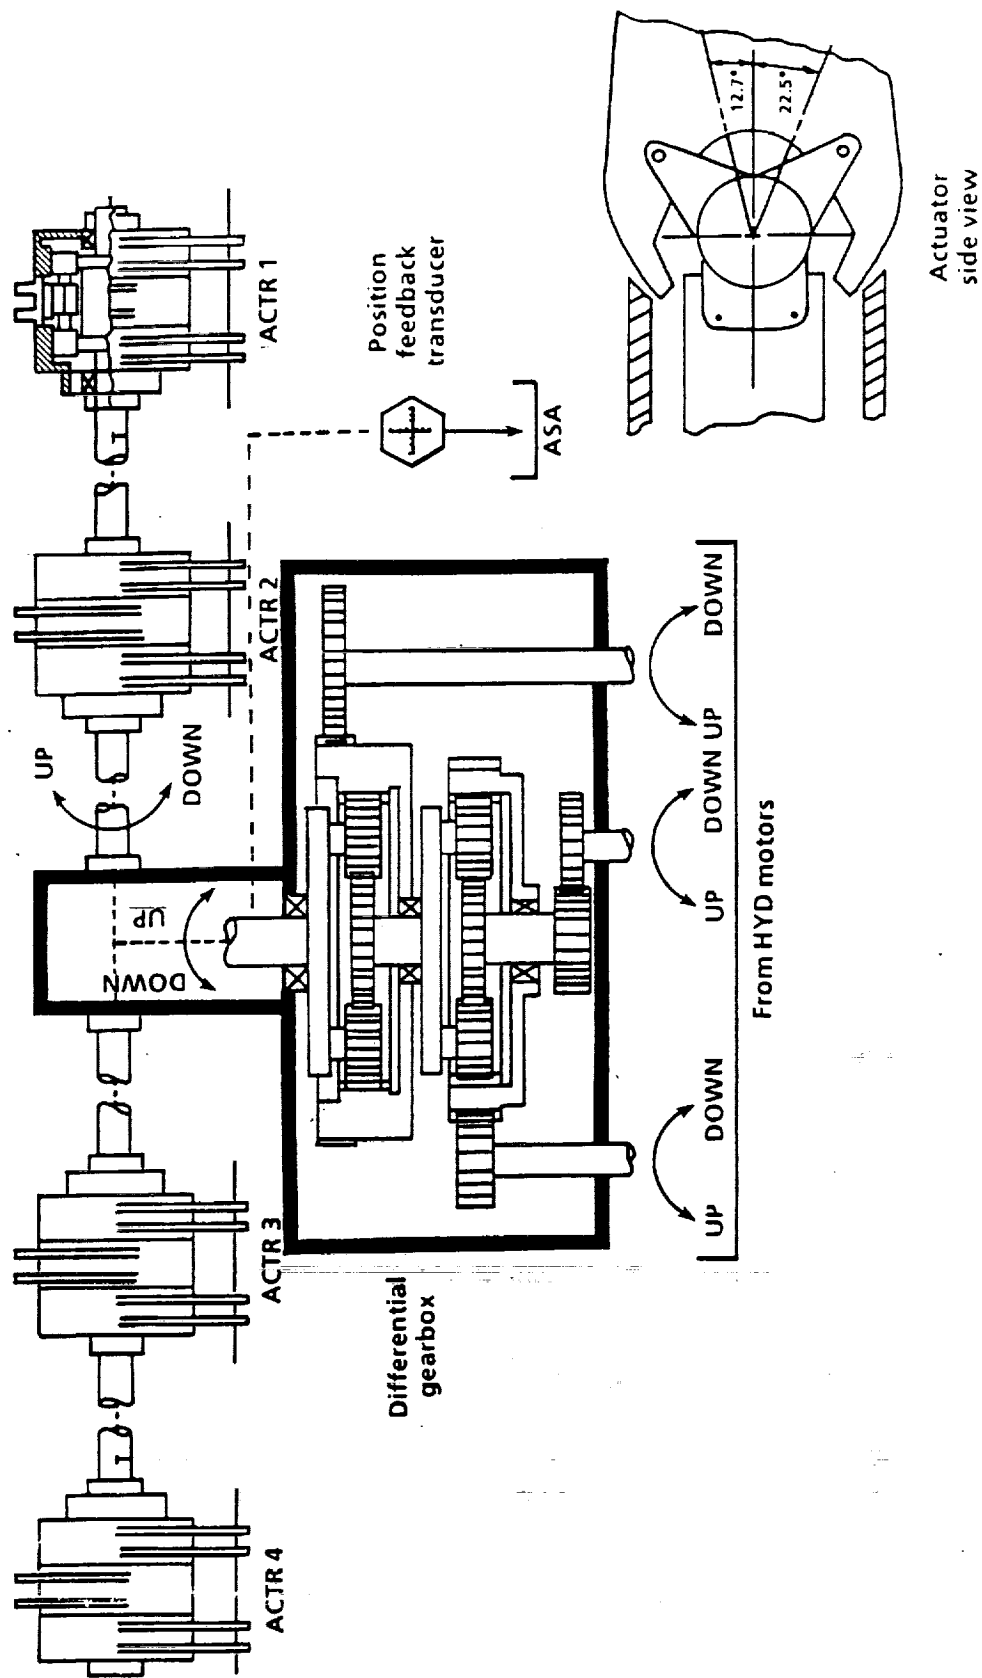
BODY FLAP DIFFERENTIAL GEARBOX AND ROTARY ACTUATOR
